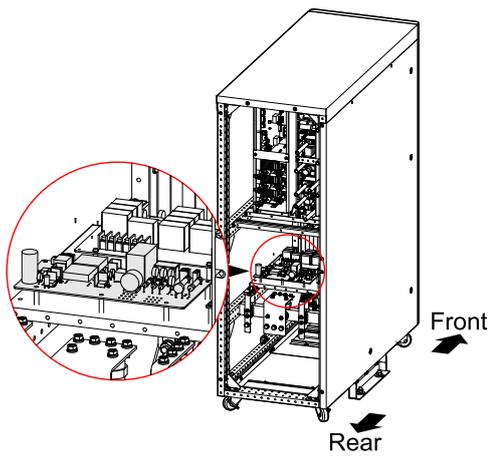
Installation position of PCB for 60K, 80K, 100K, 120K
